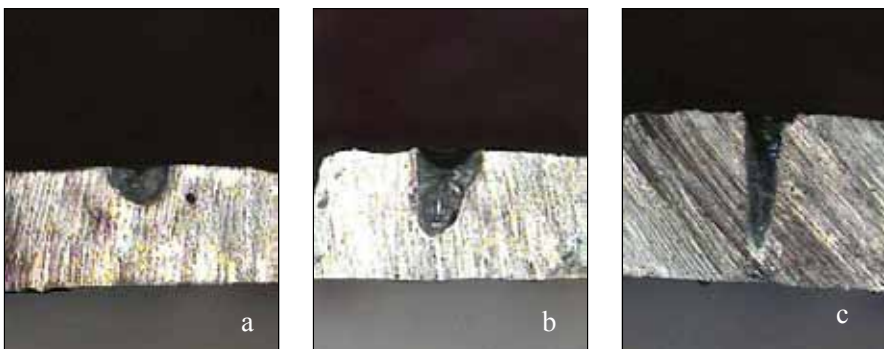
(a,b,c): Specimens welded at 240V and spot diameter of (a) 1mm (b) 0.8mm, (c) 0.6mm
